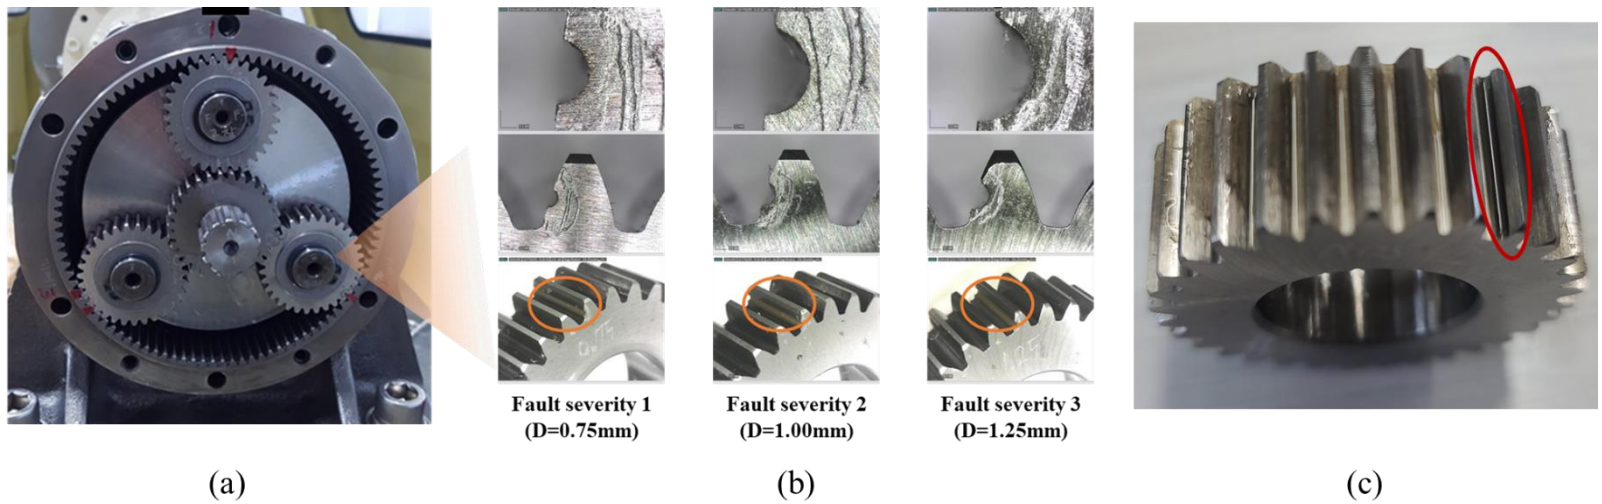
Faulty planet gear having half-circle-shaped line spall; (a) Cross section of the target planetary gearbox, (b) Different 3-level fault specimen (c) Upper view of fault specimen.
